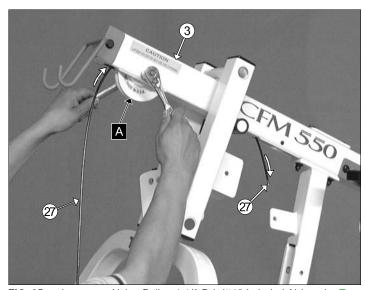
Insert the welded bolt of the Adjustable Pulley Bracket (#17) through the hole located on the Guide Rod Retainer Housing (#11) and secure it into place at the top using one Flat Washer SAE 1/2" (#61), and one Nylon Insert Jam Lock Nut 1/2-13 (#71).
